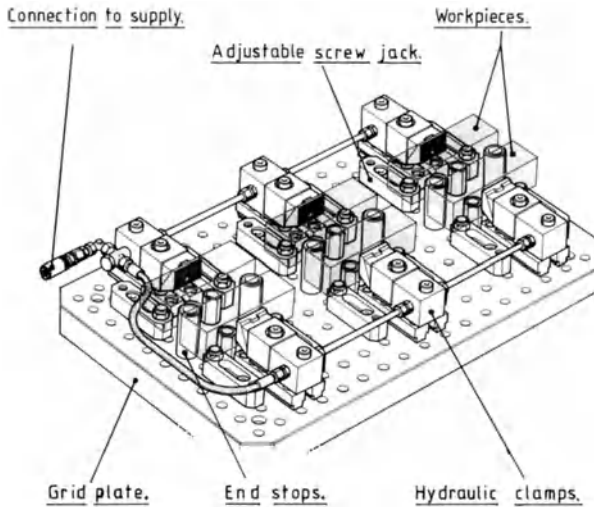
Hydraulic clamping of multiple parts based upon the “modular fixturing concept” on a hole pattern in a grid plate. [Courtesy of Wix & Royd Ltd.]
